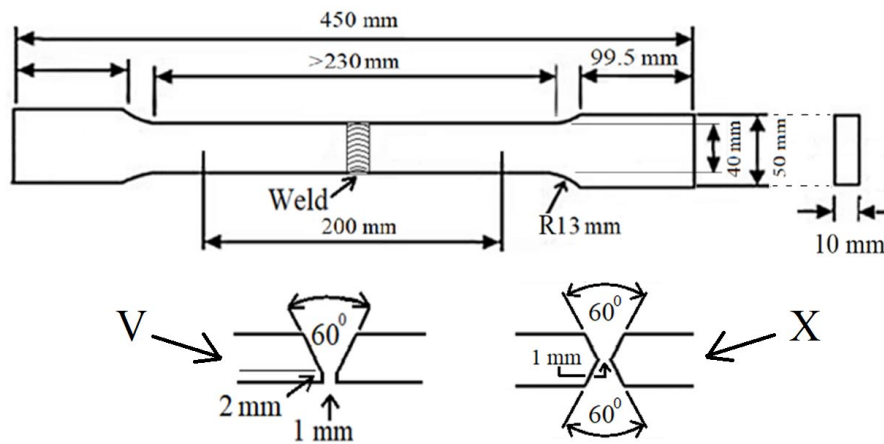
The dimensions of the samples for the tensile test were prepared in accordance with the guidelines outlined in ASTM E8/E8M [18], featuring both V and X groove shapes
